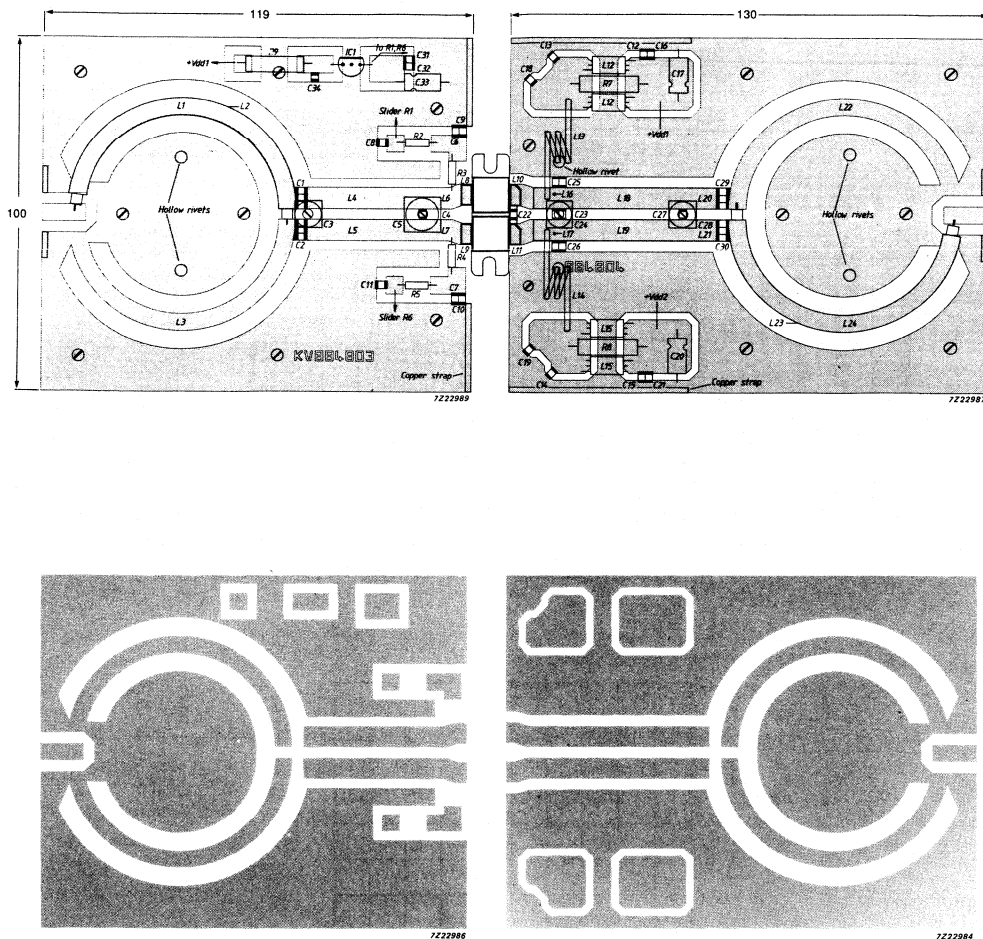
Component layout and printed-circuit board for 225 MHz test circuit.
